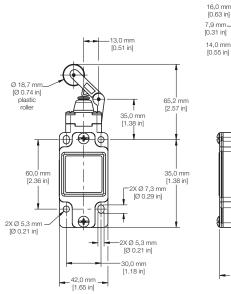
GSC/GSD Roller Arm (Head Code D) Dimensions
